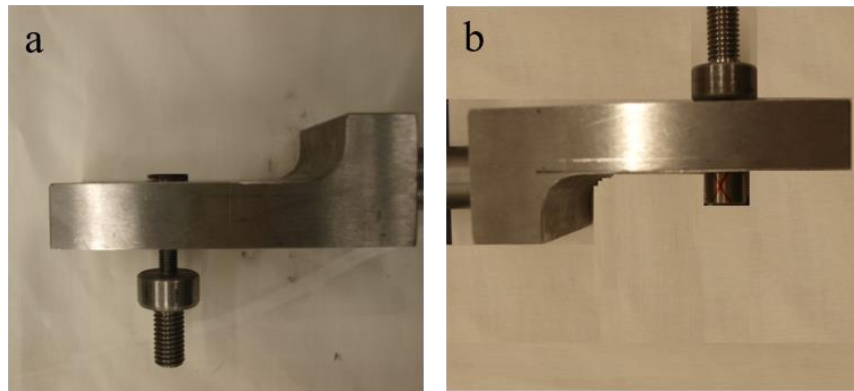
Shear test fixture: a) WC-Co side, b) diamond side.
